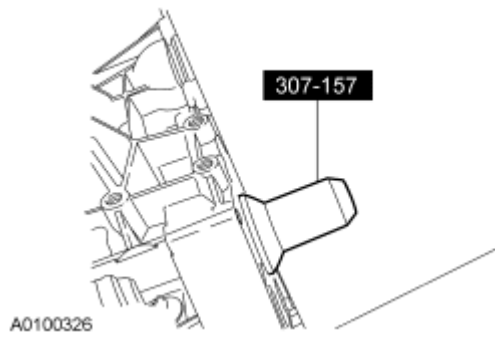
Installing RH Differential Seal Using Special Tools (2 Of 2)
